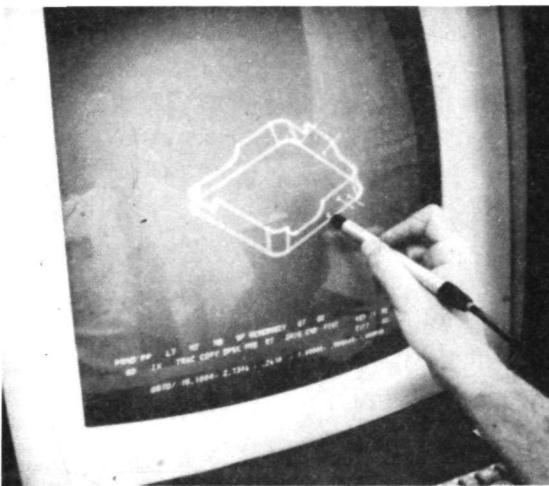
"Blasting" Points on the Surface of the Part Where the Probe is to Make Contact
